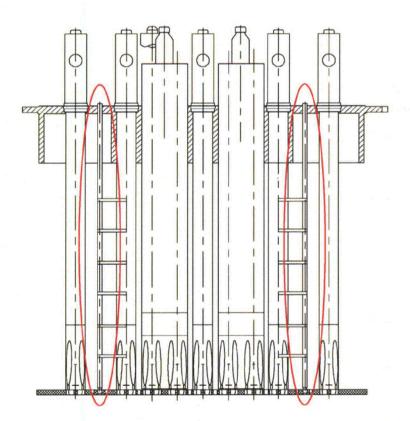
CE Core Shroud Assembly with One of the Guide Lug Inserts Highlighted
